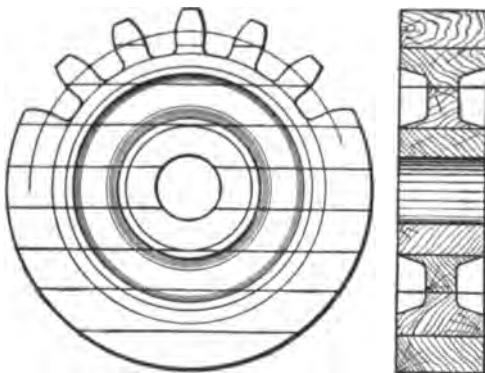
Section Showing Small Gear Made from Glued-Up Stock
